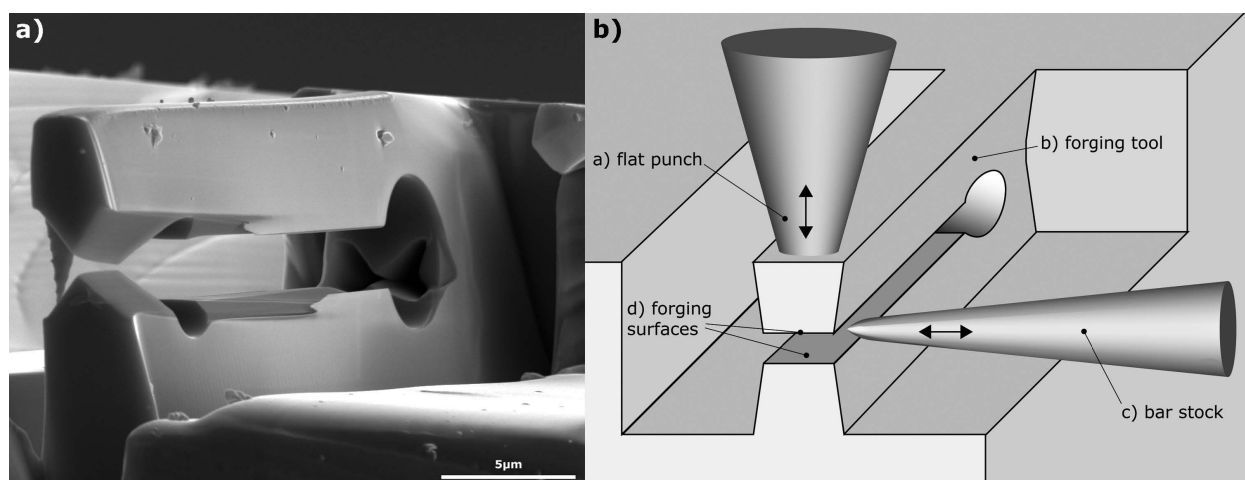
Spring principle of a cutting tool on the left (a). Installation schematically on the right (b). The upper bending arm of the forging tool moves down when pressing on it with the flat punch. It moves in its initial position while load release due to the elastic force. The bar stock is moved between the forging surfaces.
